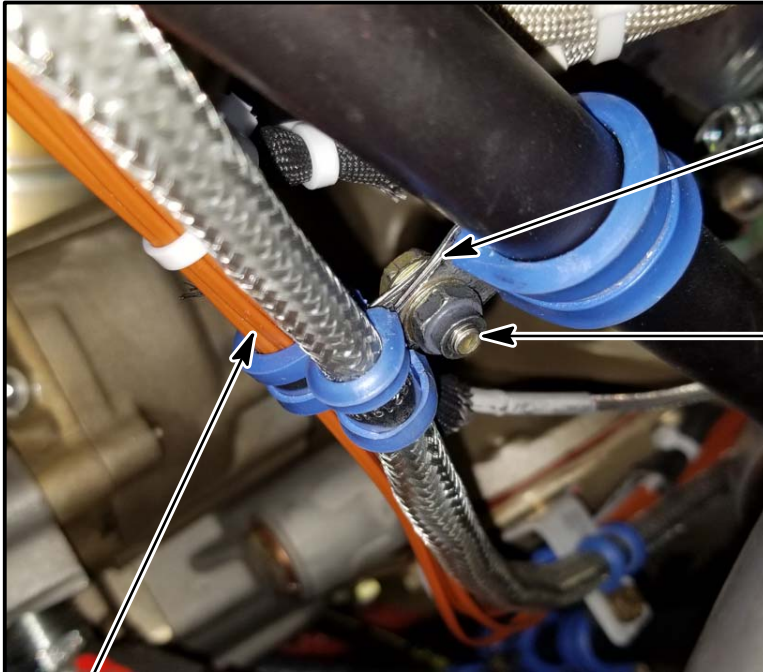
ALTERNATOR CABLE ROUTING LOCATION (RH ENGINE MOUNT)
